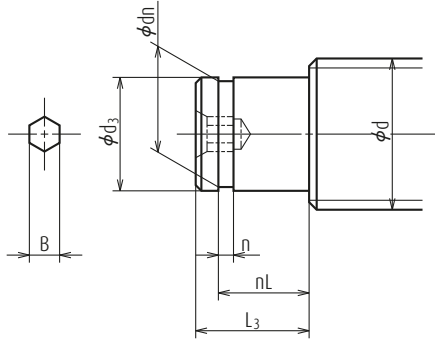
Shaft end configuration of R Series (opposite to the drive side)
